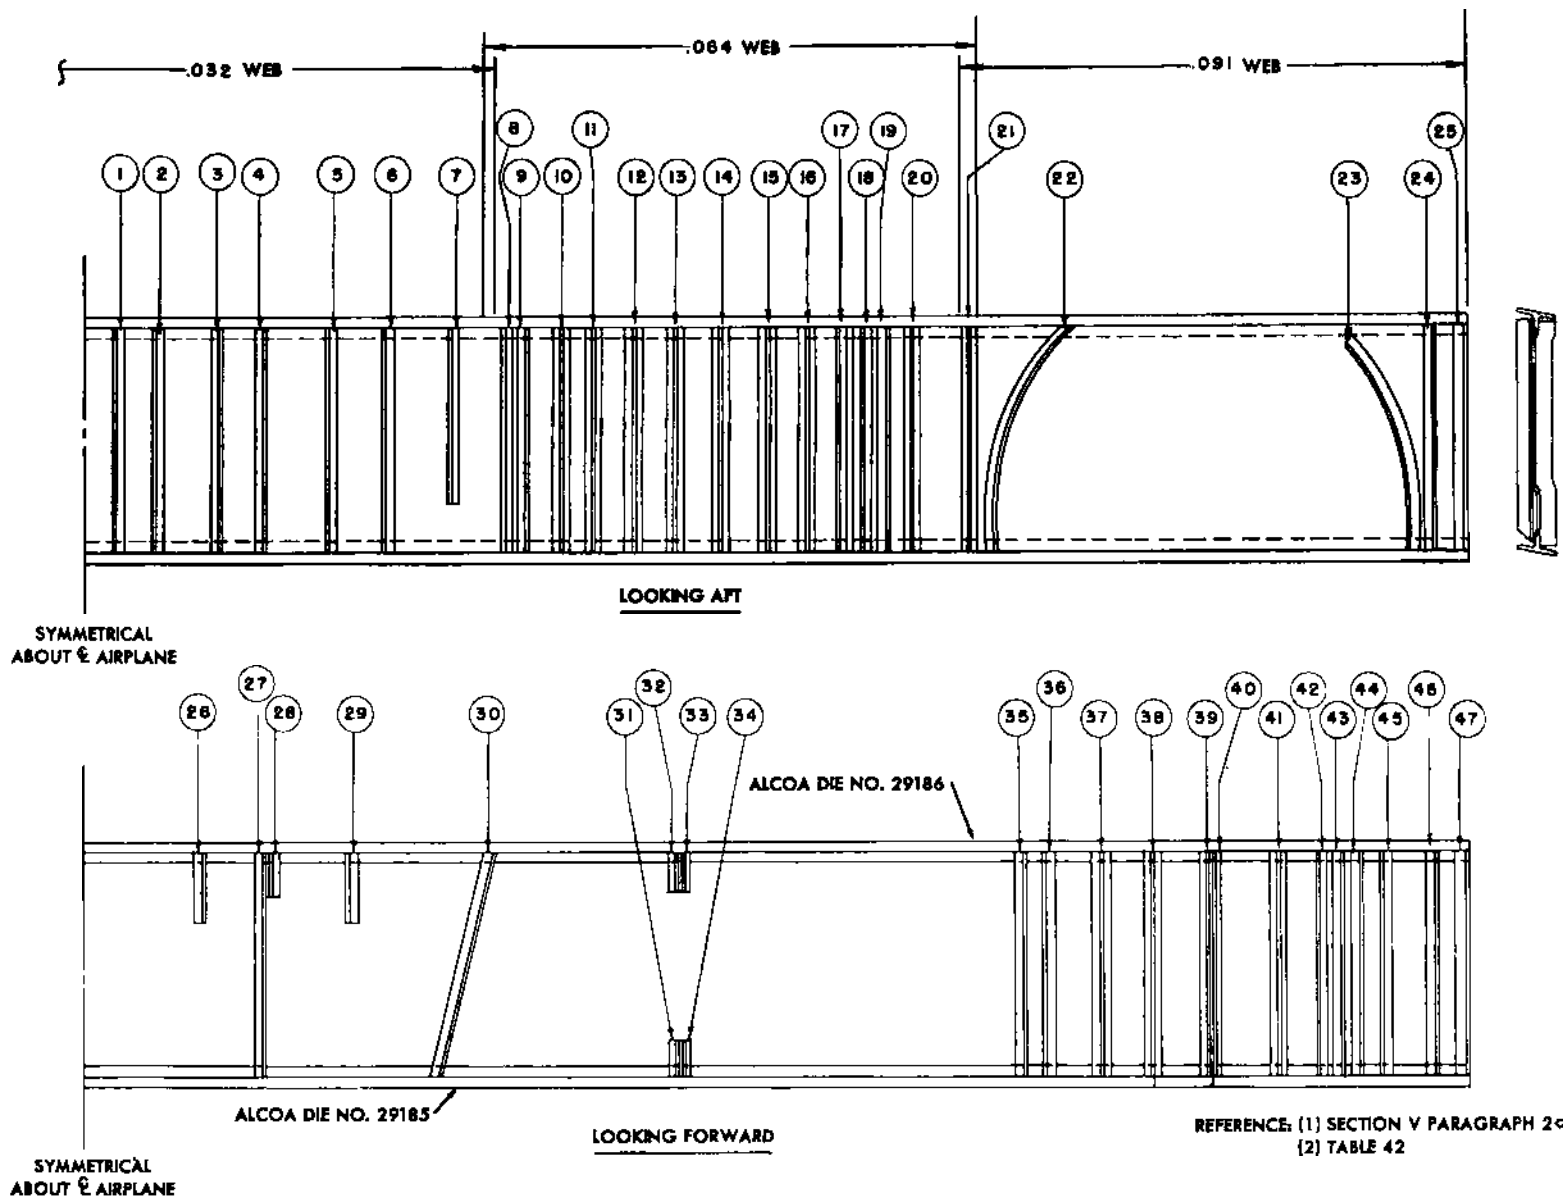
WING SPAR ASSEMBLY—CENTER PANEL FRONT
